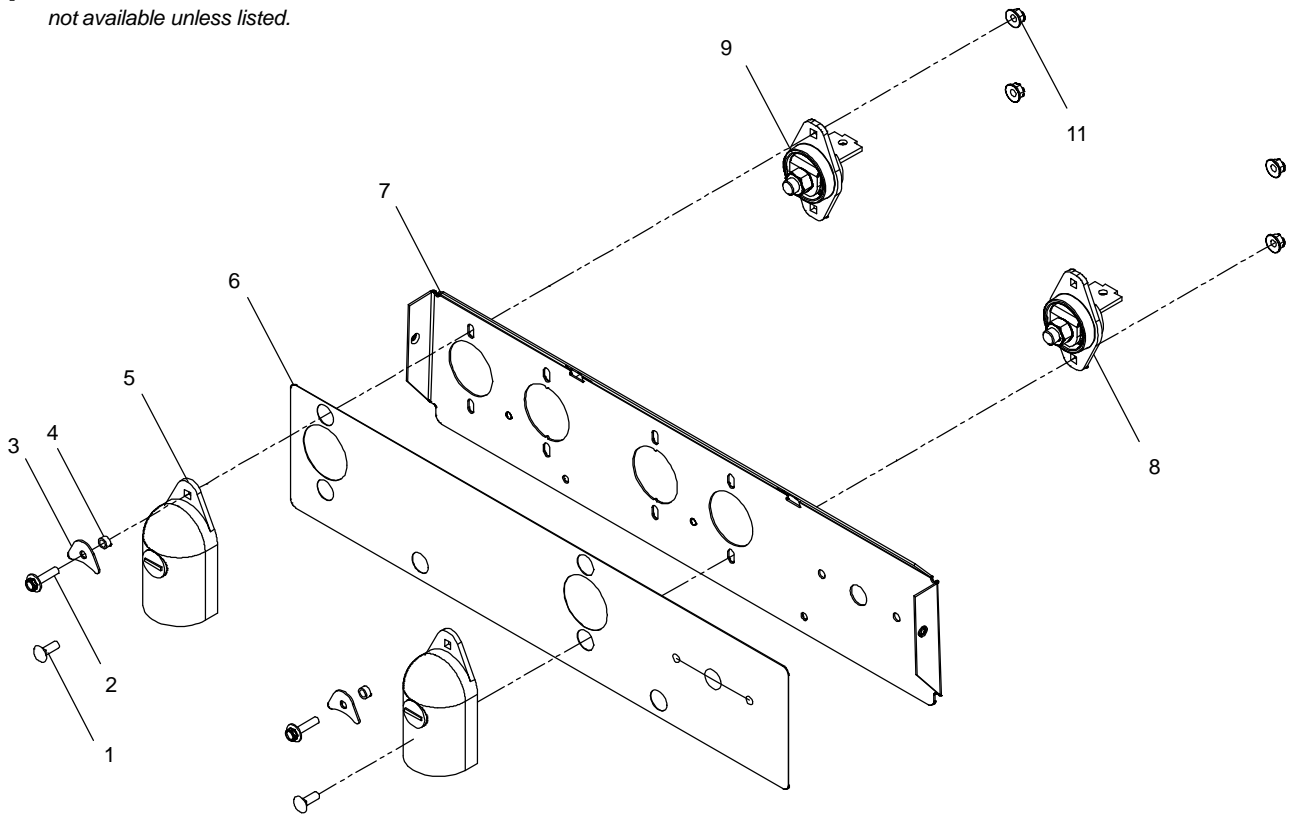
Panel, Weld Output (Figure 1-1, Item 1)
